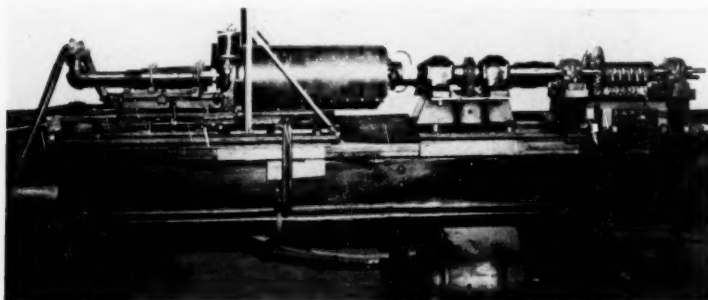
The specially designed commutator is installed at the right of the centrifugal casting machine, and the internal burner used as a preheater for the mold is shown on the left.
